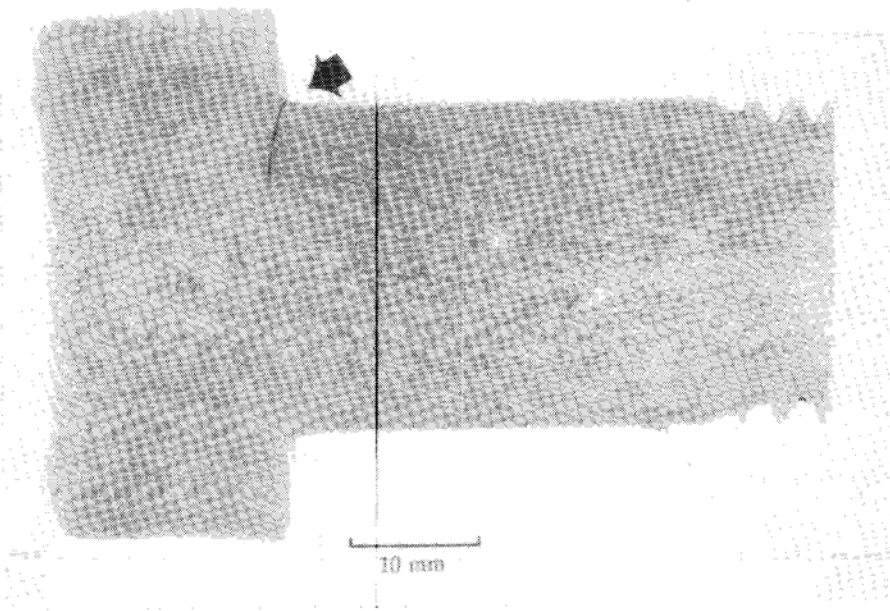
Cross-section of dryer bolt showing typical stress corrosion cracking under bolt head.
